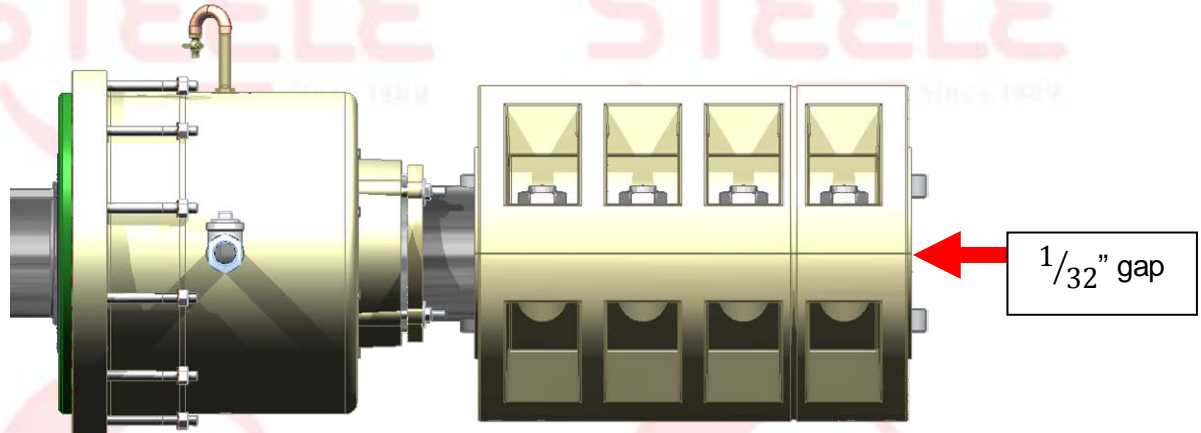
Side view of thrust assembly and shaft coupling, showing the placement of the coupling gap
